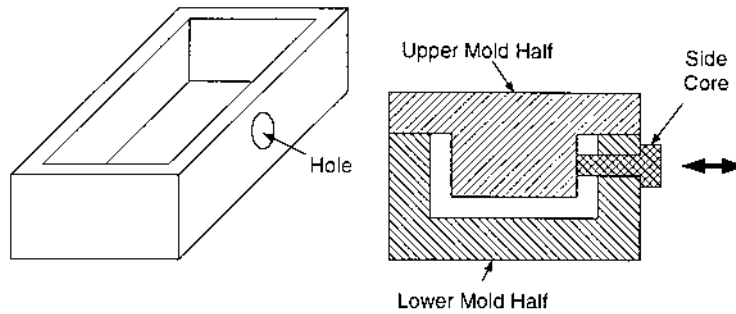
In die-casting and mechanized permanent mold casting, undercuts that prevent mold opening require core slides.
